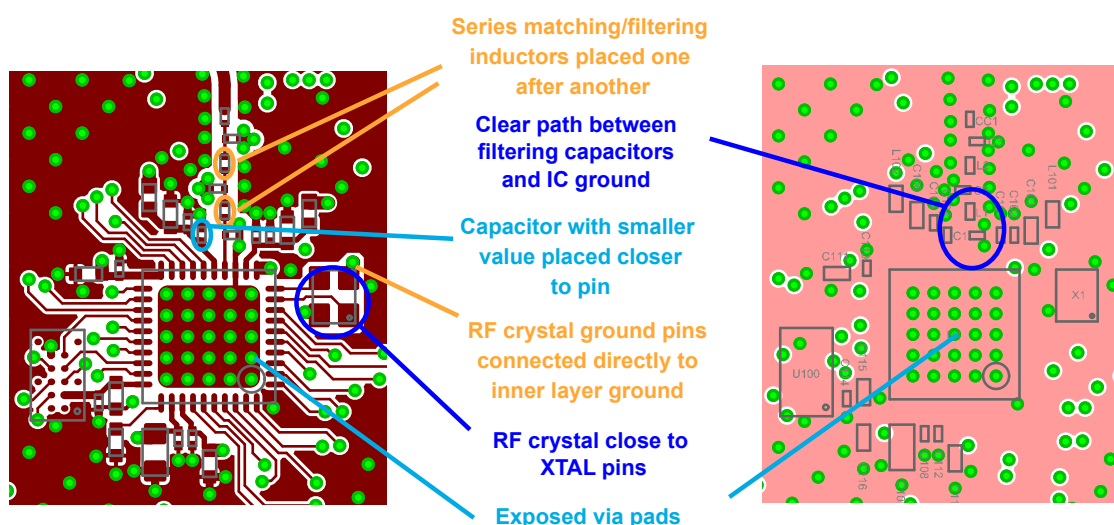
VDD Filtering, RF Crystal and Exposed Pad Ground Layout Guidelines on BRD4408A (Top Layer, Inner Layer 1)
